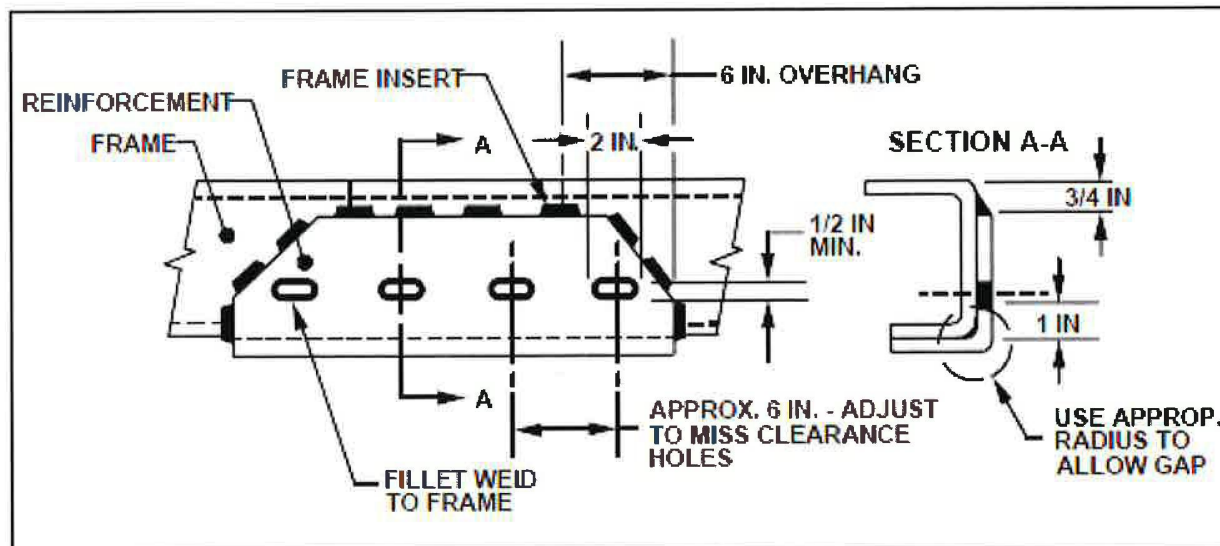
Preferred Method for Reinforcement and Welding
